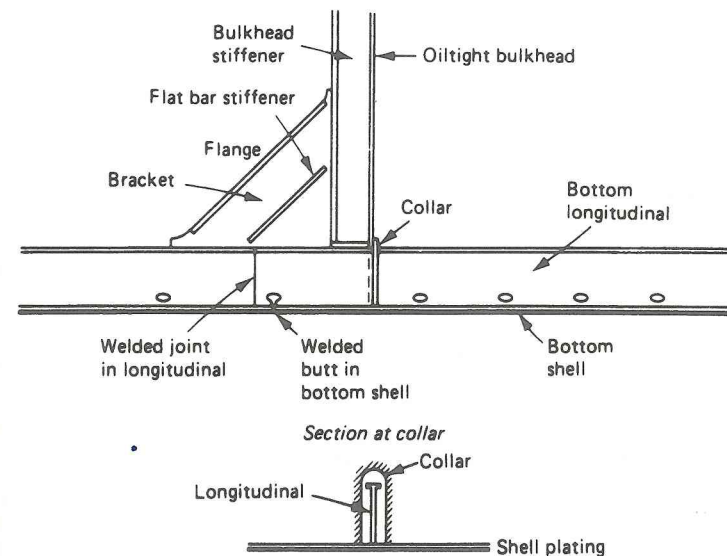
Continuous longitudinal arrangement through a watertight bulkhead
